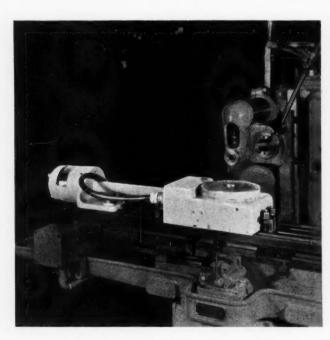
Sundstrand Automatic Indexing Base for Horizontal Mounting on Rigidmil
